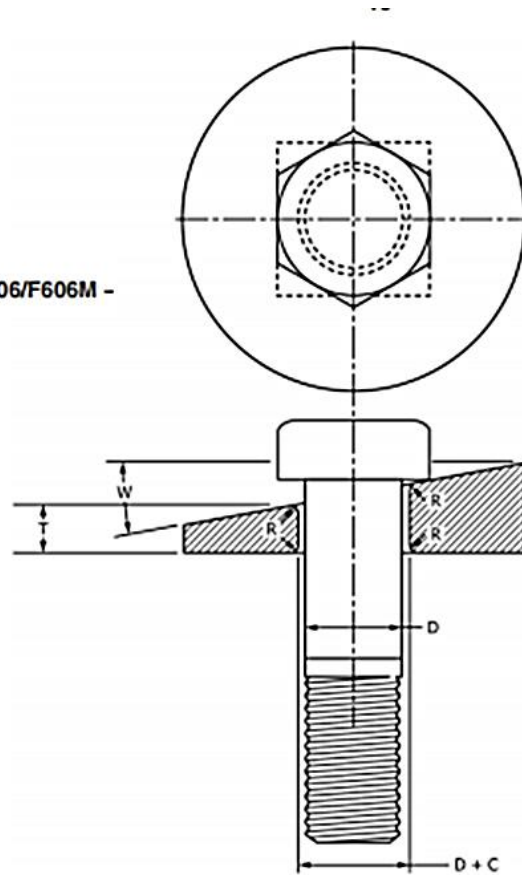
Tension Testing of Full-Size Bolt (Typical Set-Up)
